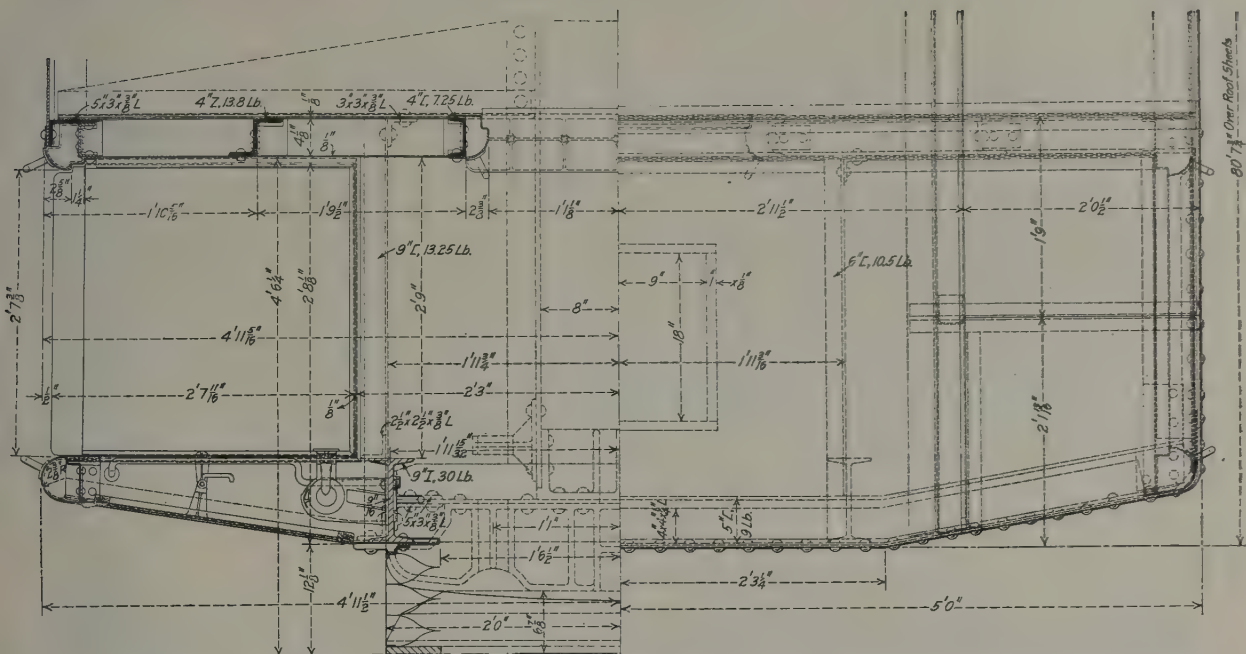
Horizontal Section Through End Frame and Half-Plan of Hood. Canadian Government Railways Sleeping Car.
